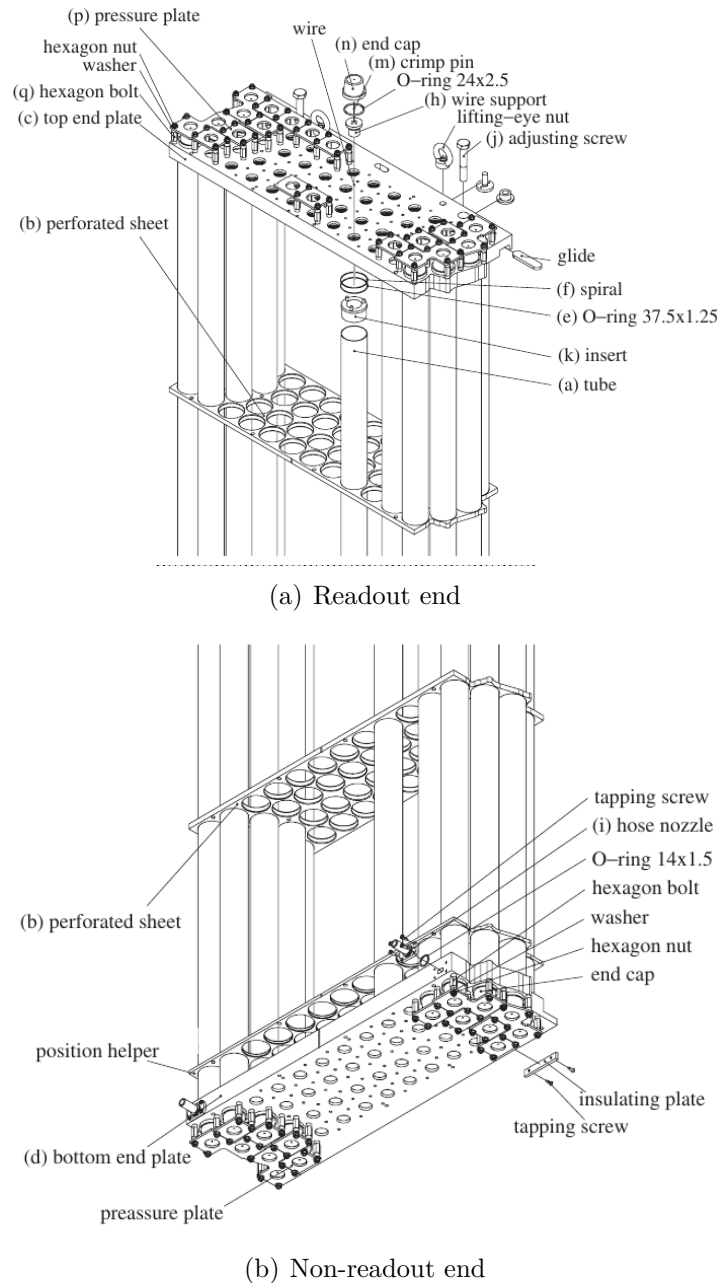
Explosion sketch of an OPERA type drift tube *module*. A module is a physical assembly of 48 drift tubes arranged in four layers of twelve tubes each. Edited from [94].
